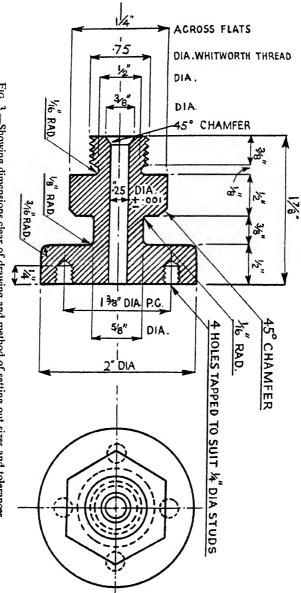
Showing dimensions clear of drawing and method of setting out sizes and tolerances.
